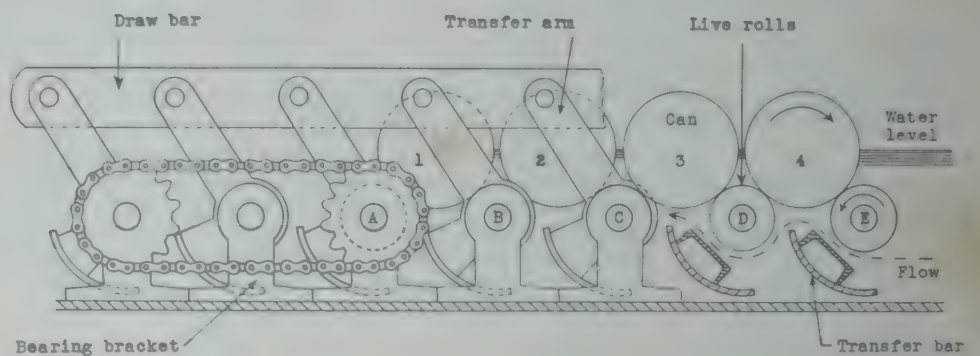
Agitating vacuum process. Thermo-Roto machine. Diagrammatic view from side of machine, showing end bearings for a series of rollers, transfer bars at rest during rolling period, and draw bar by means of which transfer bars are operated. Chain Belt Company.
